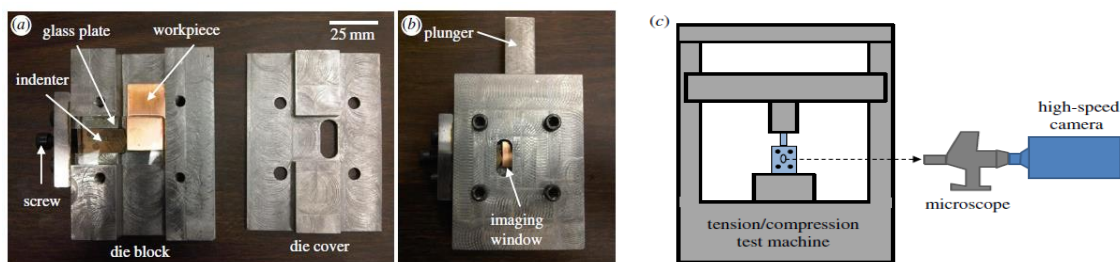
Cutting and friction tests on tensile/ compression test machine, [Guo, 2015].
